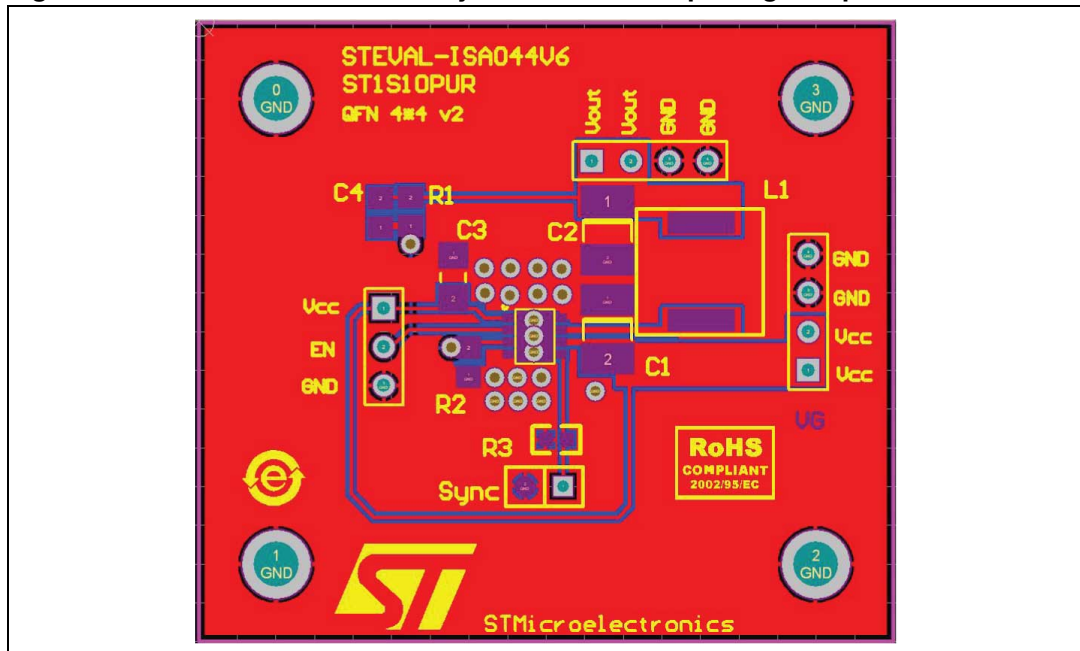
Demonstration board layout ST1S10 MLP package - bottom side
